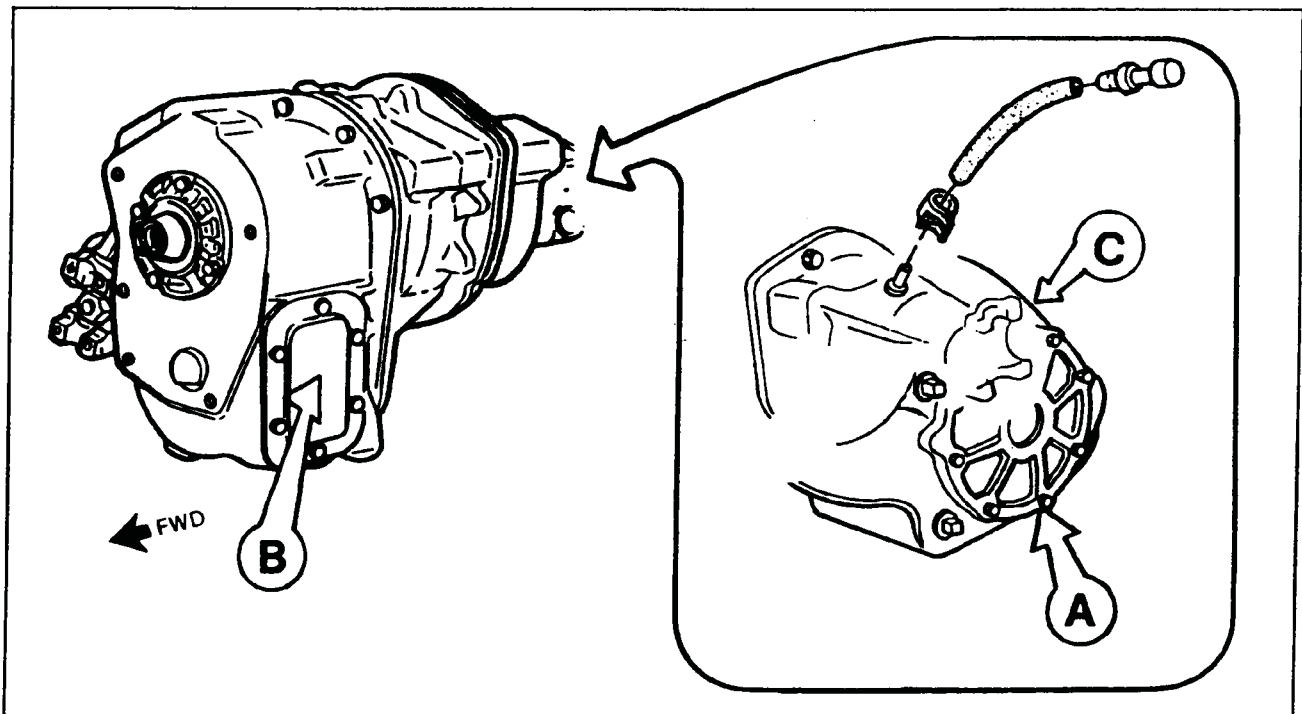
Model 203 Transfer Case, Oil Change Location View
